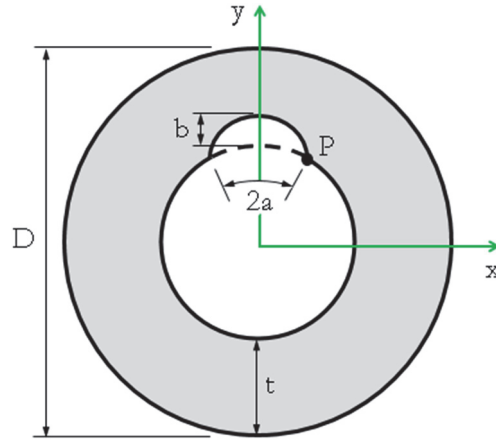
Dimensions of a circumferential internal surface crack at the pipe cross-section with the largest crack dimensions.
